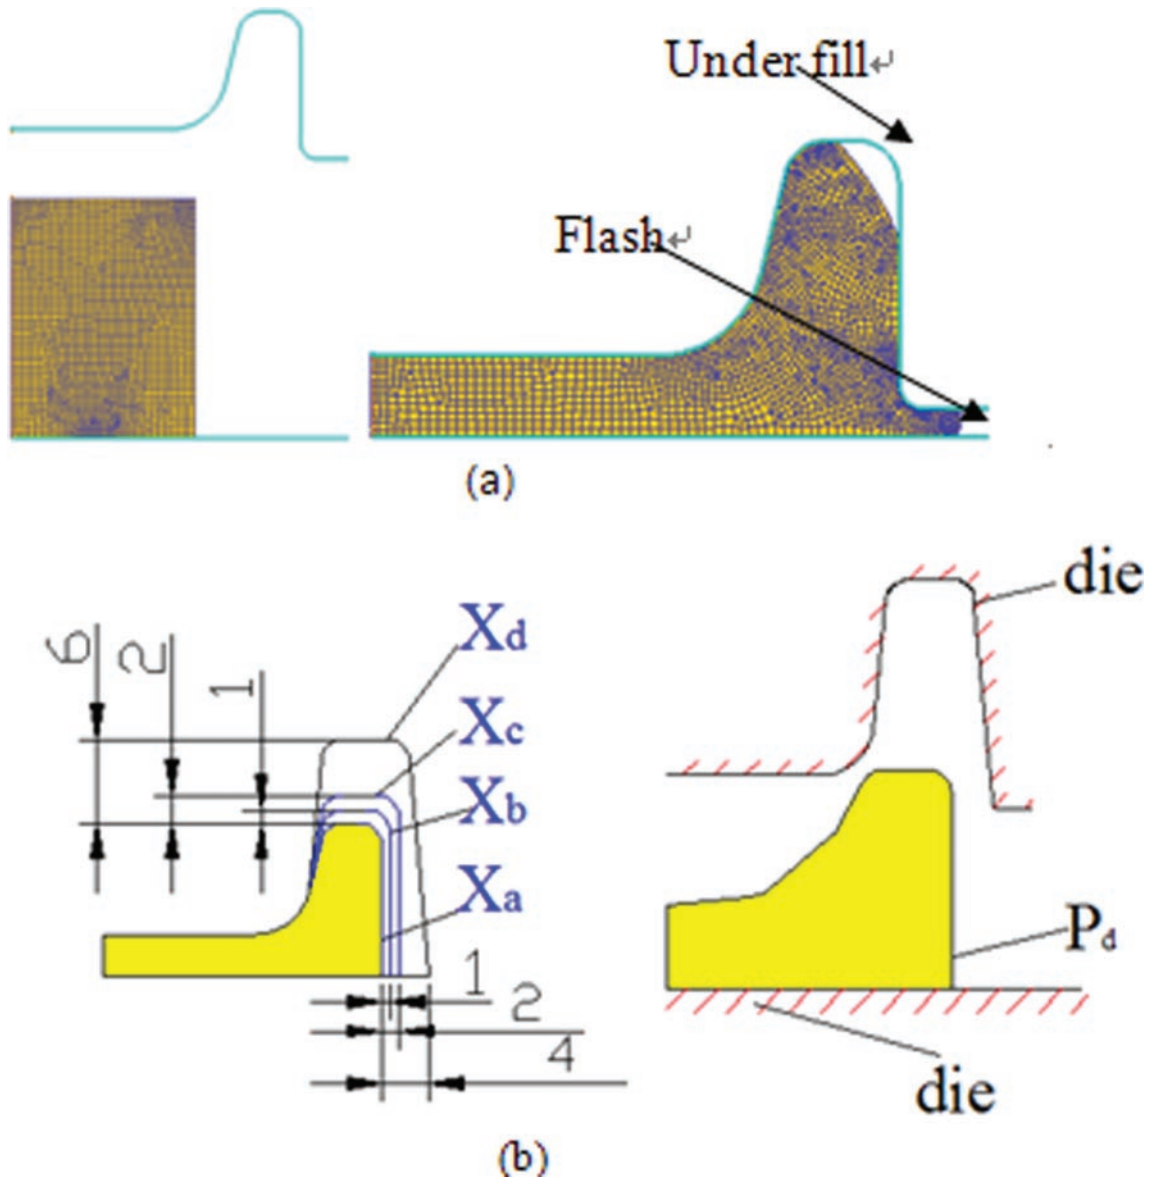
(a) Defects after direct forging, (b) constructed larger parts and guessed P_d
